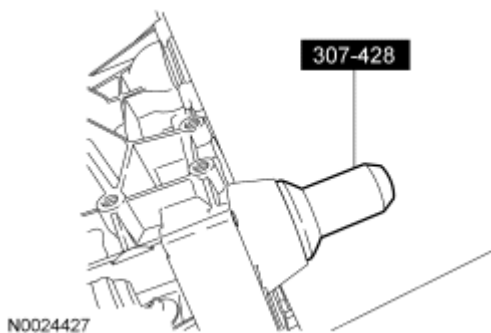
Installing RH Differential Seal Using Special Tools (1 Of 2)
